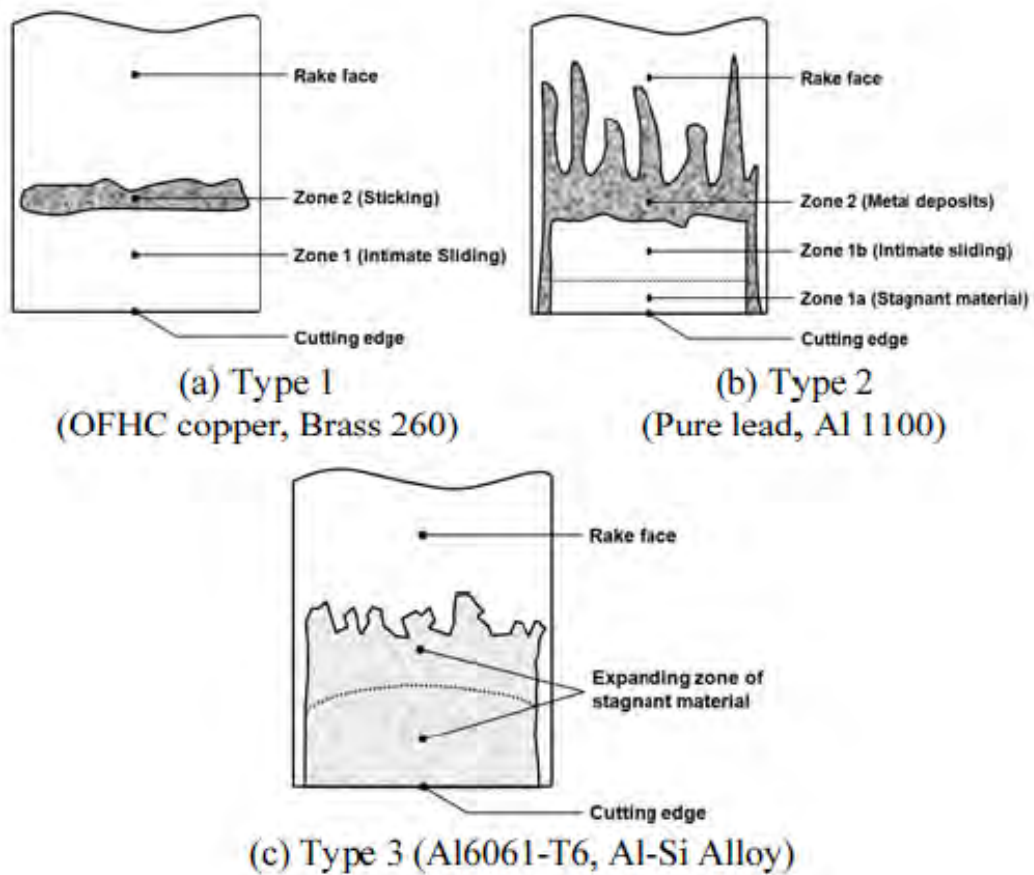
Classification of chip-tool contact conditions by workpiece materials. Taken from [20]
